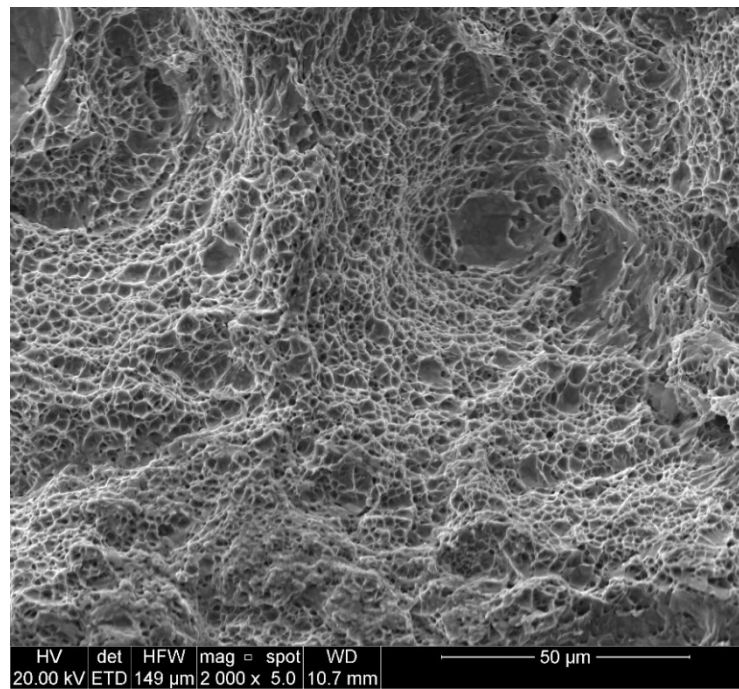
Detail of L3AB-2 fracture surface in the ductile fracture zone.
